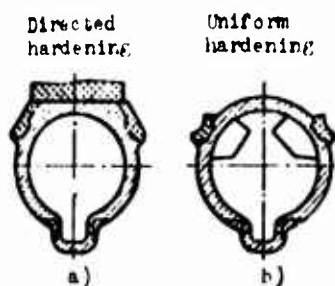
Cast construction; a) with riser and directed hardening of metal from bottom to top; b) with refrigerators, uniform hardening.
